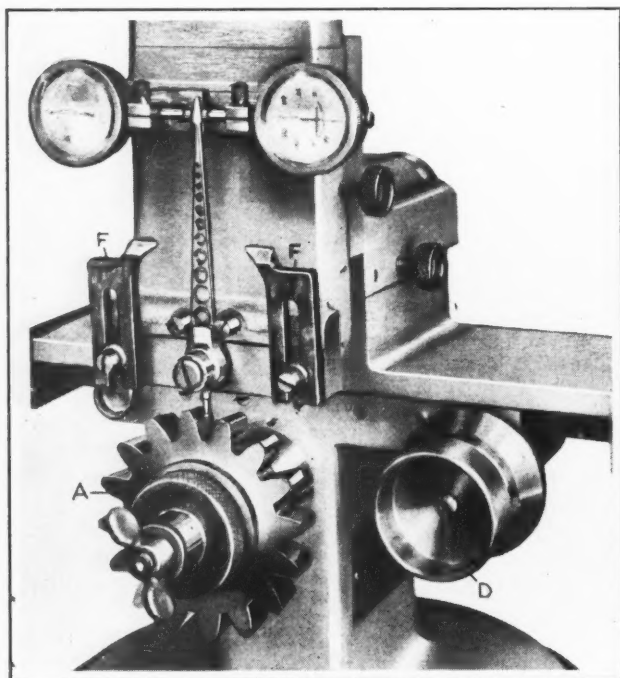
Manner in which the Testing Machine is arranged for checking the Involute Form of Gear Teeth
